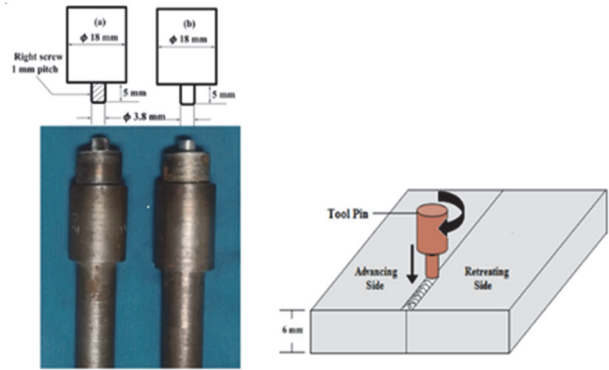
a) Geometry of pin profile; b) Friction stir welding process
